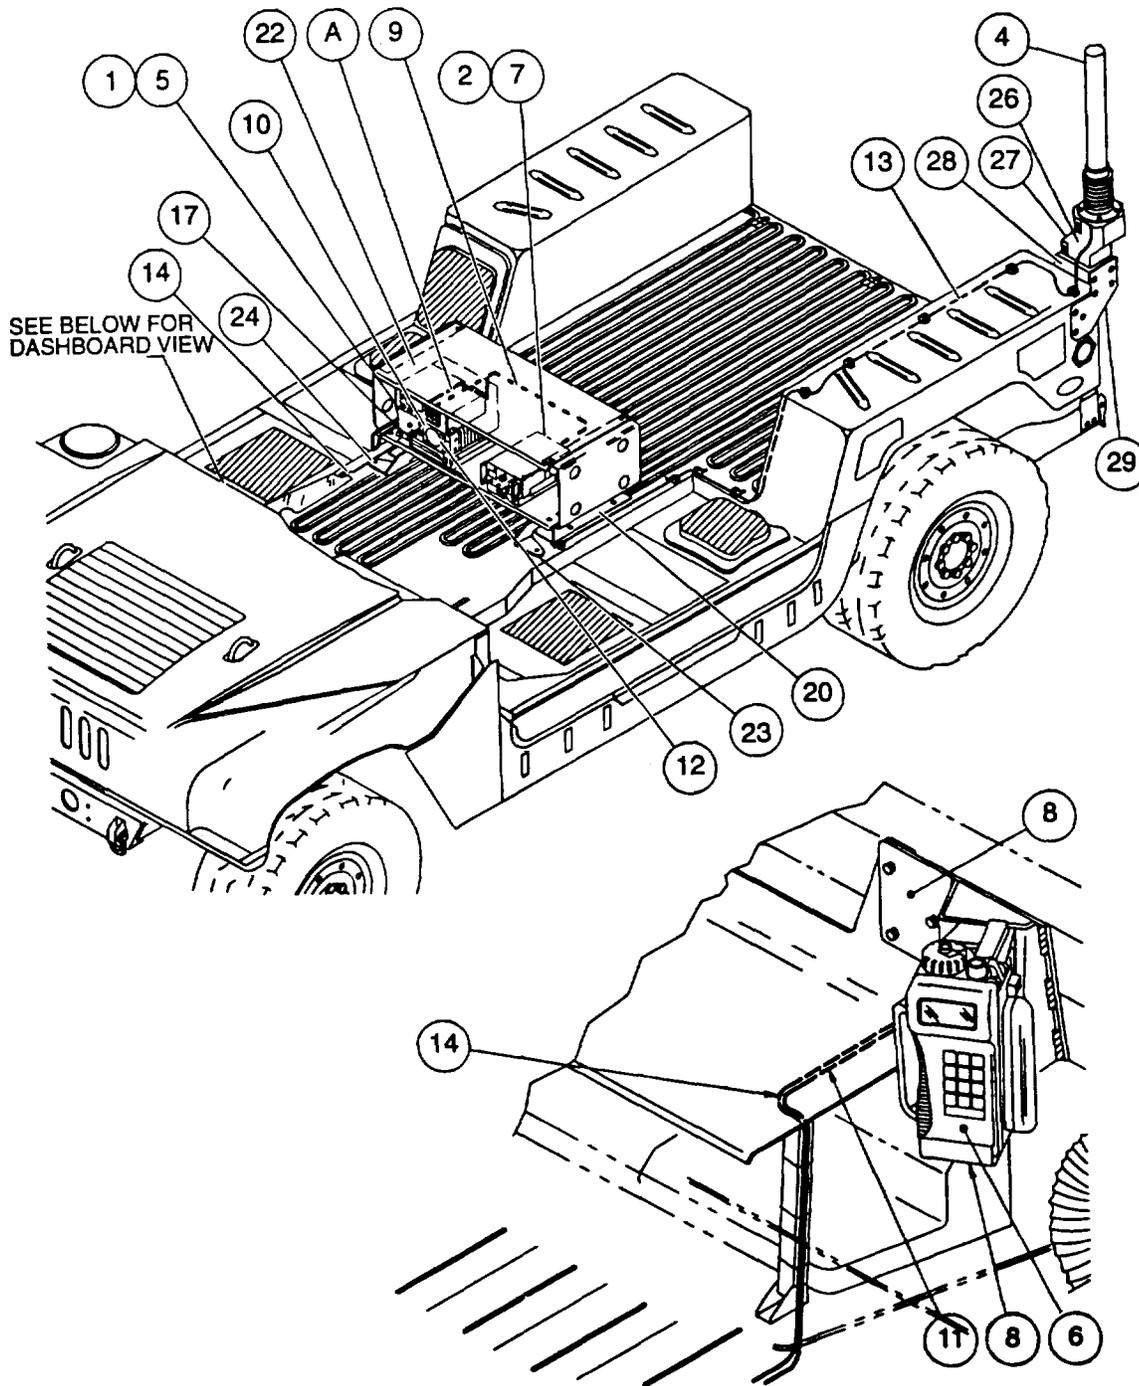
AN/GRC-240 Installation Equipment Locations Overview
